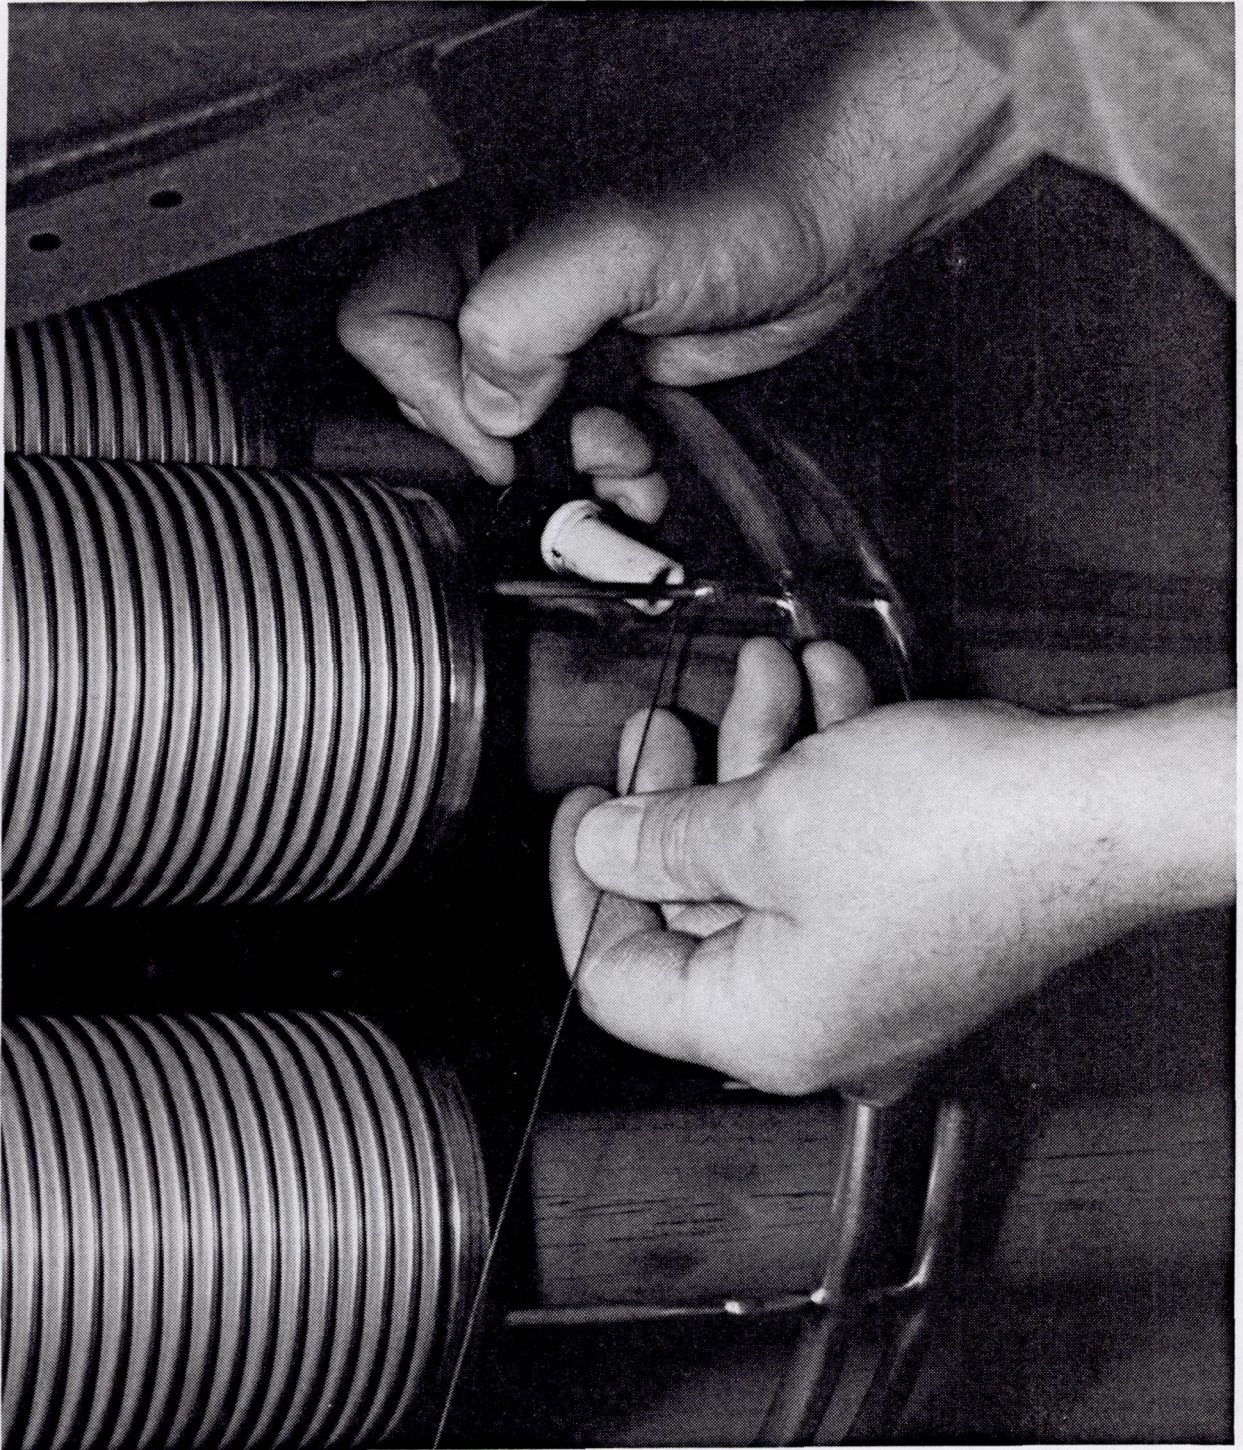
Welding Lower Salt Manifold to Heat Storage Tubes
